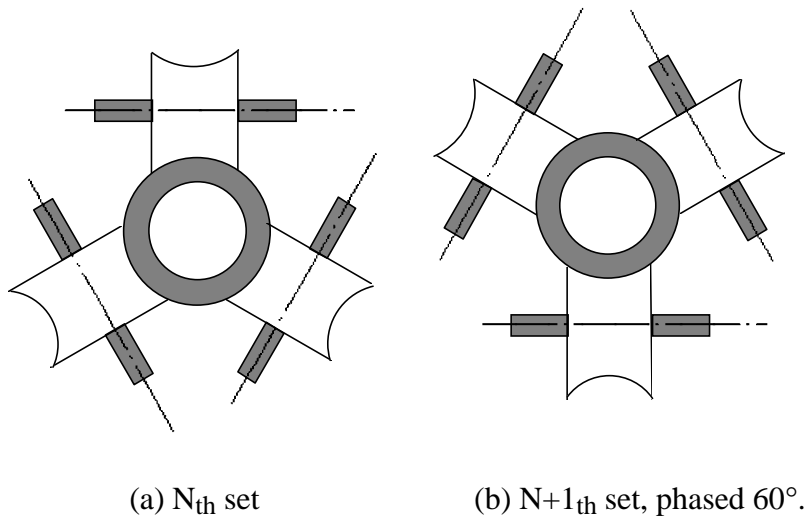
Roller Arrangement in the Stretch Reduce Mill.
